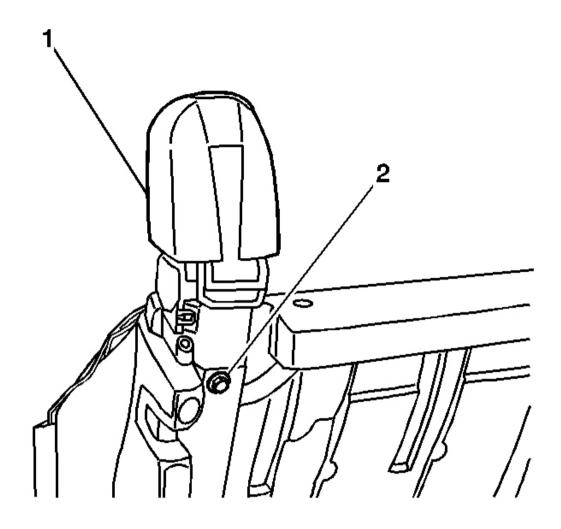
Seatbelt Retractor Bolt Cover & Retractor Mounting Bolts Courtesy of GENERAL MOTORS CORP.
